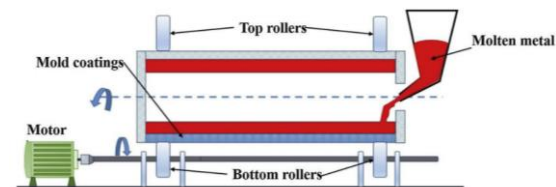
horizontal centrifugal casting machine(redrawn from [11]).
